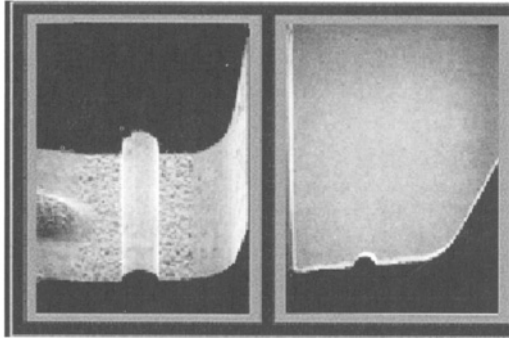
Wedge tool with cross groove design [Courtesy : Microminiature Technology]
